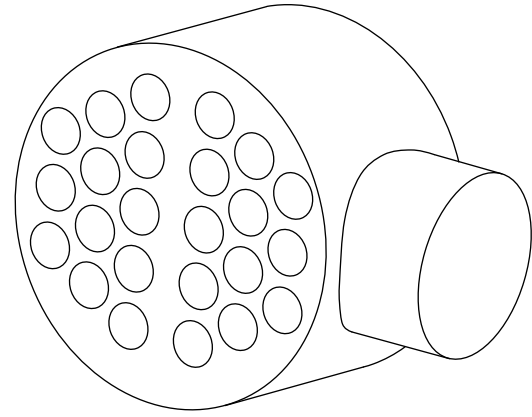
Inlet zone of a shell and tube heat exchanger with 24 tubes.
